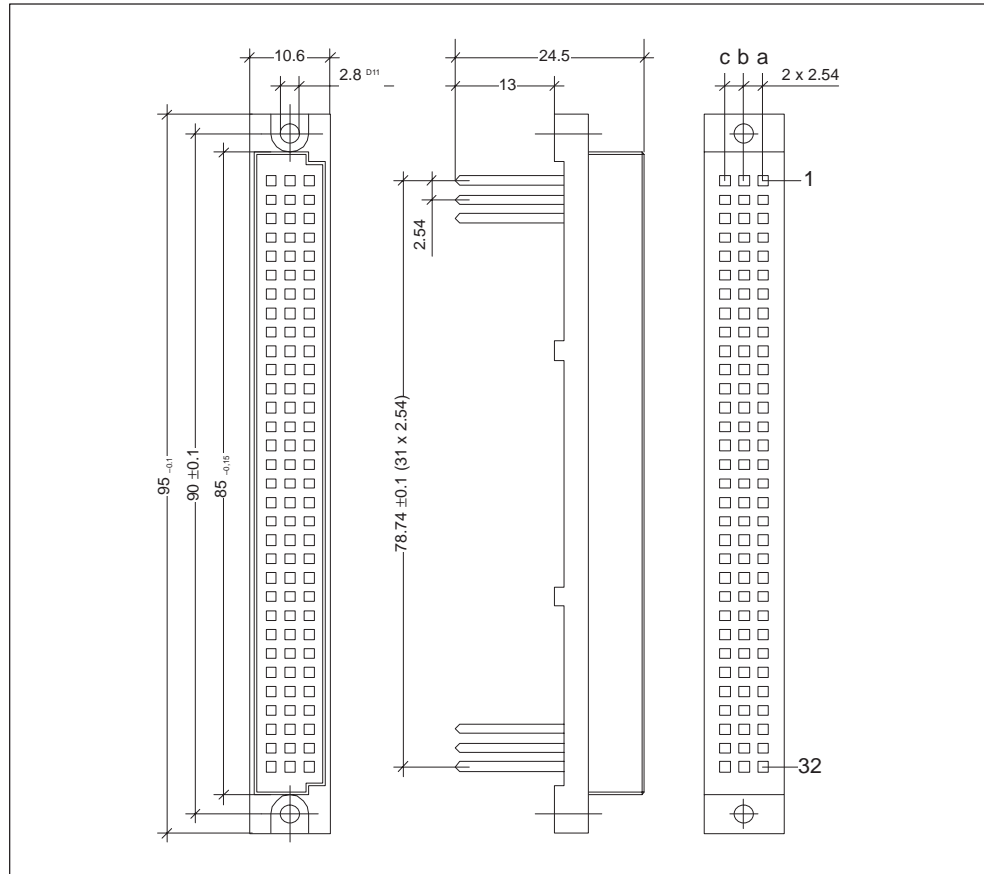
Dimensional drawing of a 96-pin bus socket terminal strip (dimensions in mm)
